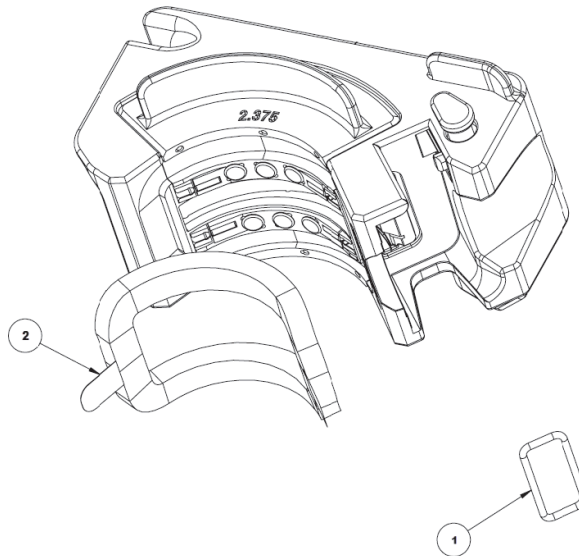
SFA1-AUTO and SFA1-SMALL wedges exploded view
